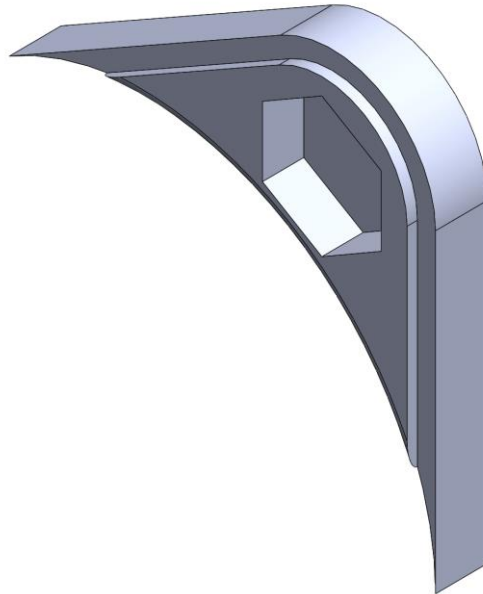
Inside face of pin mill endcap, showing the hexagonal cutout for the smaller bearing capsule.
